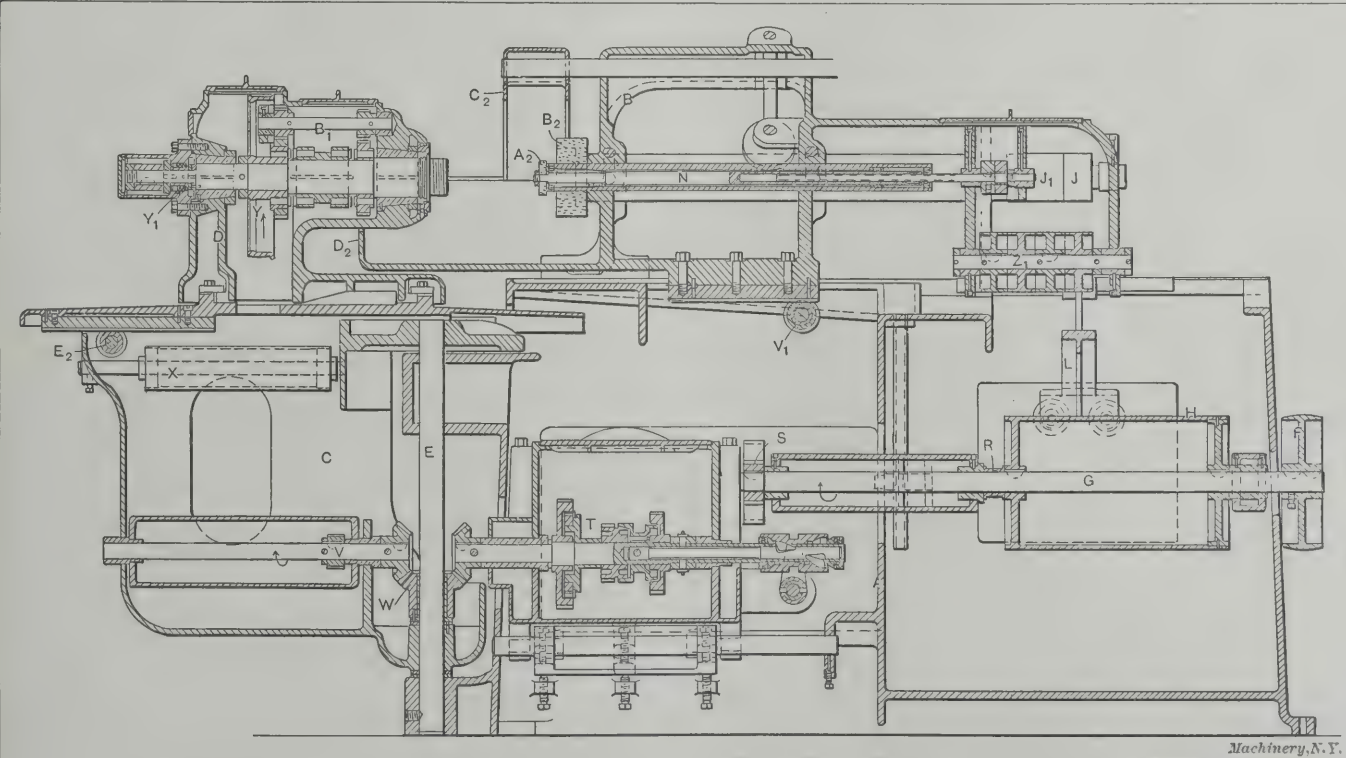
Longitudinal Section, showing Work and Wheel-driving Mechanism, and General Structure of the Machine
